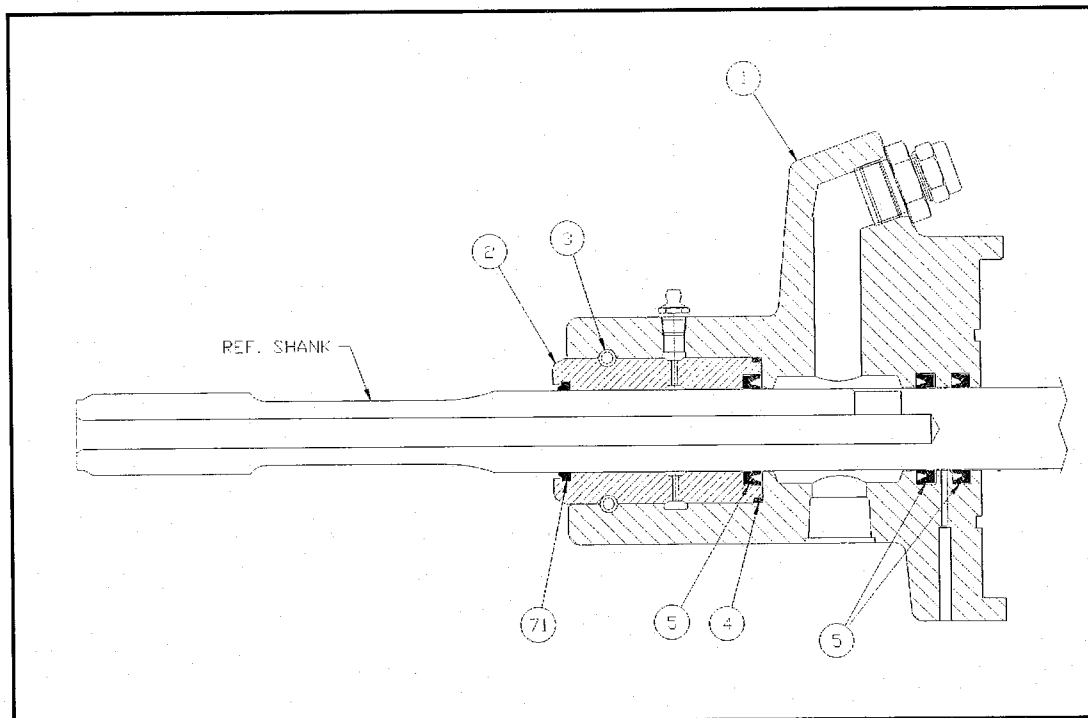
Water Swivel Assembly (ref. 407596)
